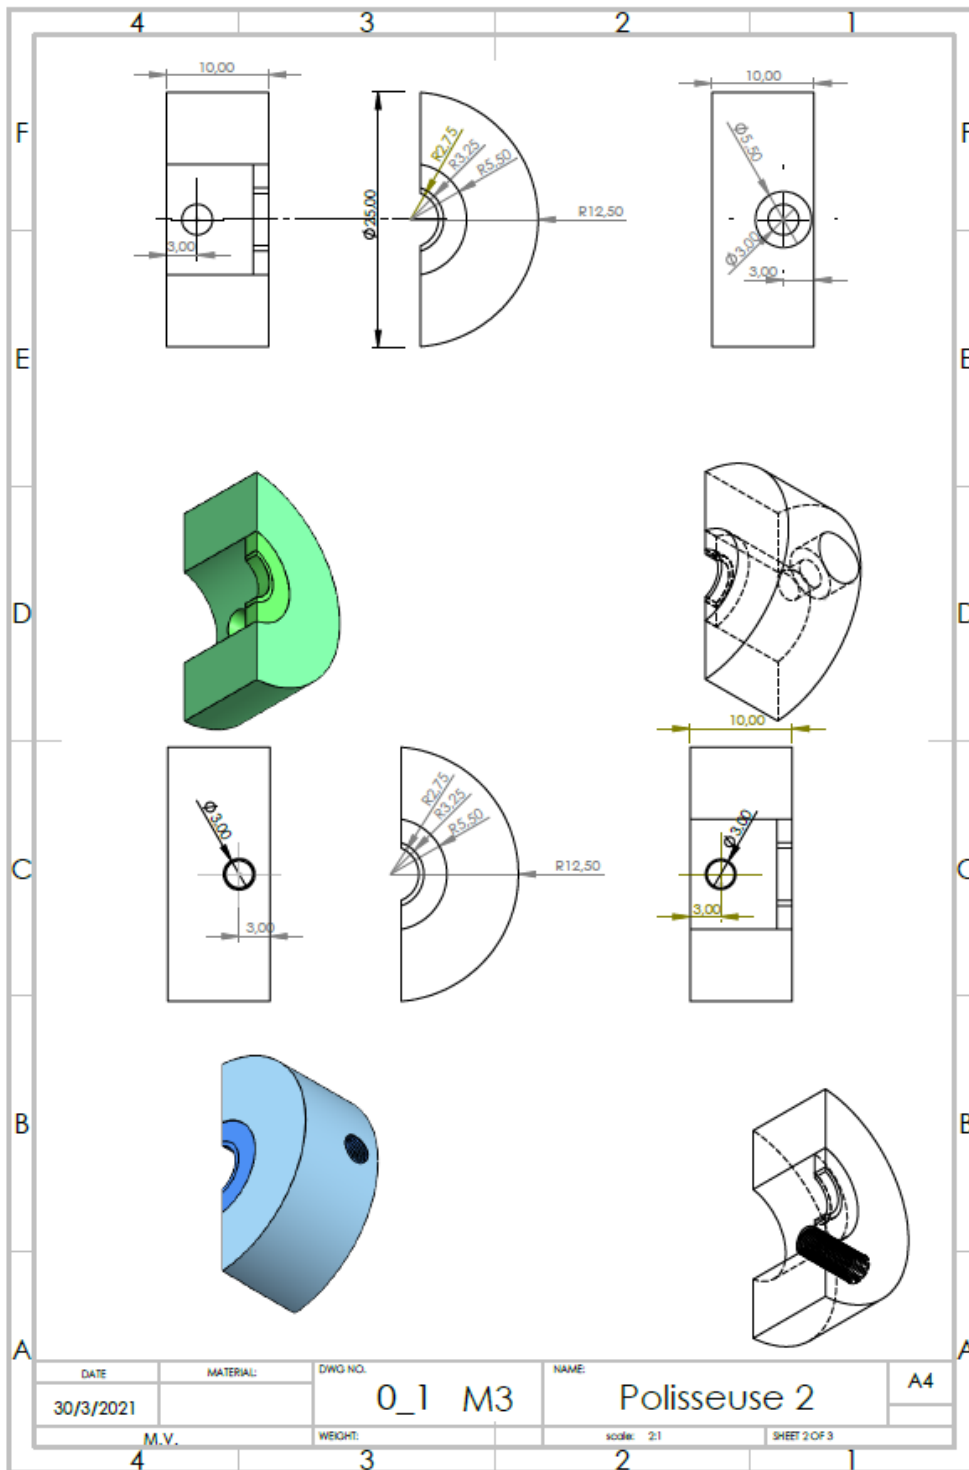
Drawing with dimensions of the custom designed specimen holder (2/3)
